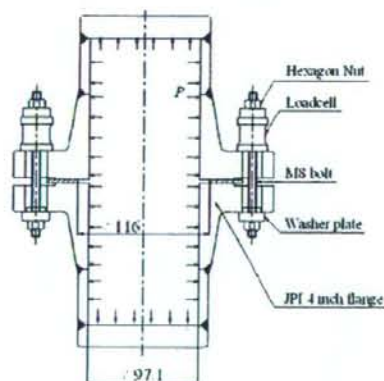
Pipe flanged joint with joint seat gasket subjected to internal pressure.
